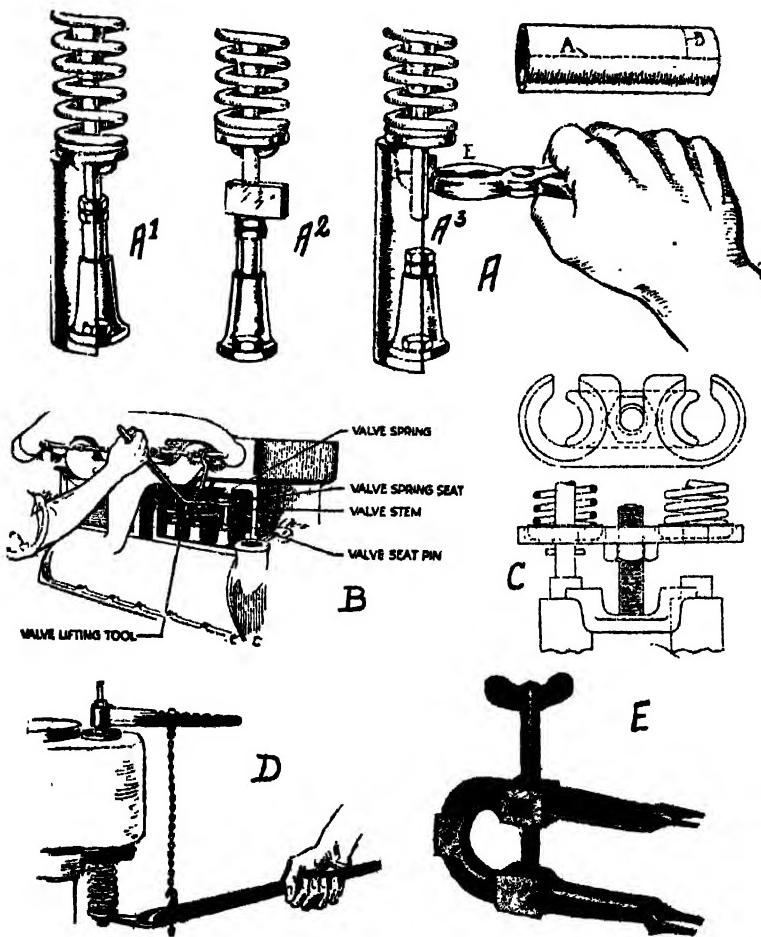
Valve Spring Lifting Tools of Varied Design.
